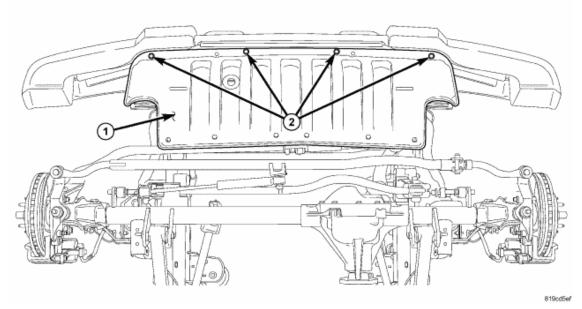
Front Splash Shield Courtesy of CHRYSLER LLC
